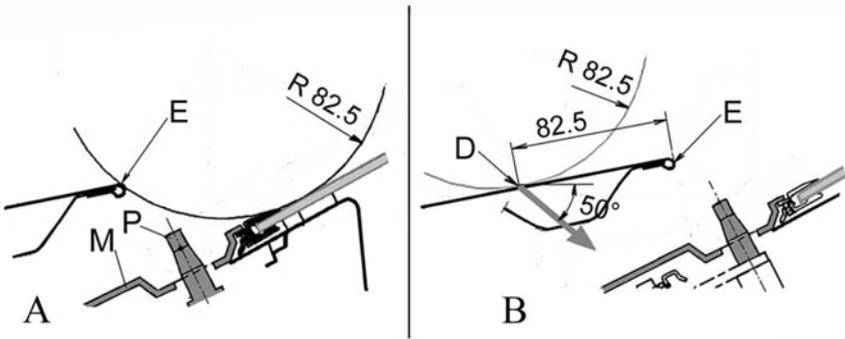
Pedestrian head dimensional (A) and impact (B) verification. No direct contact of head with wiper pivot (P) or bezel (M) should take place.
